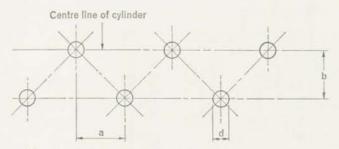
Regular Saw-Tooth Pattern of Holes
